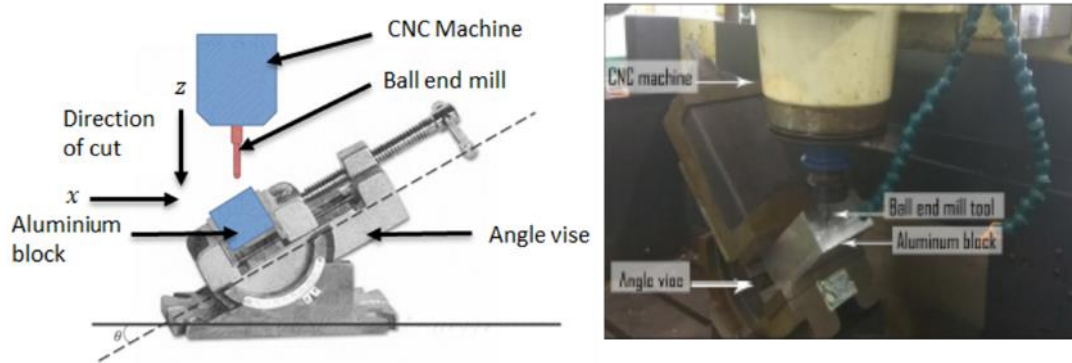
Schematic view (left) and experimental setup (right) for dimple pattern fabrication using workpiece tilt angle method
